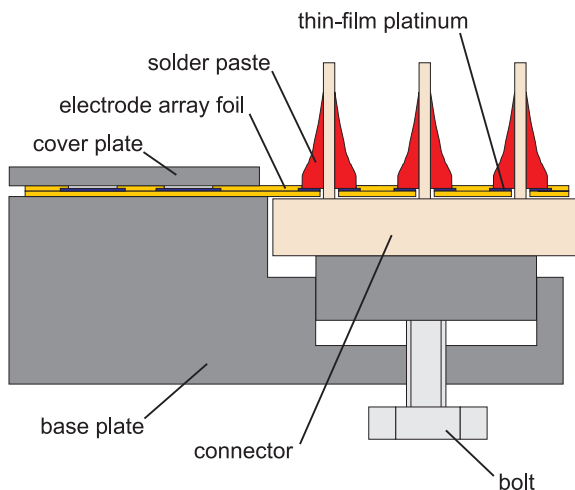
Soldering jig to hold the foil and the connectors in place while soldering.
